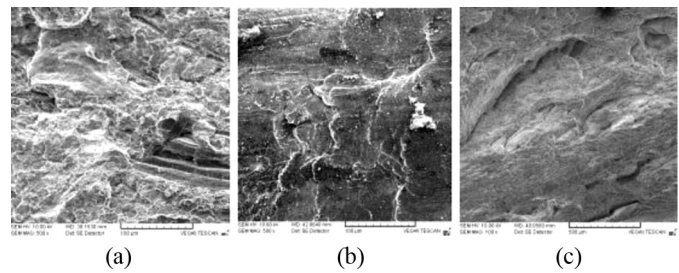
(a) Weldment with copper particles filled in the faying sides. (b) Weldment with copper coating. (c) Weldment with copper coating coupled with external heating.
